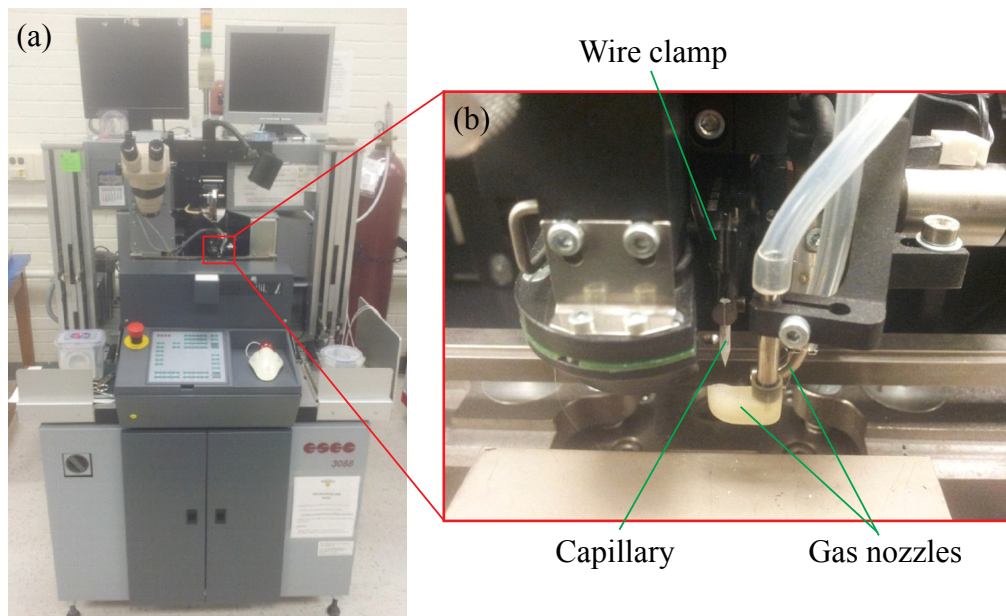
(a) The ESEC 3088 Wire Bonder with (b) close up of bondhead illustrating capillary, wire clamp, and gas nozzles.
